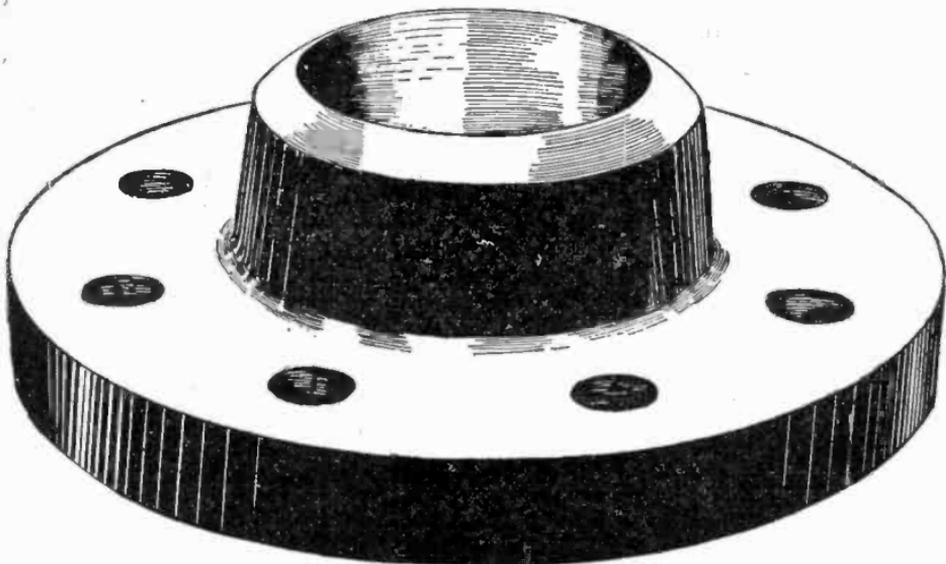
,191.—Pennforge flange as manufactured for welded pipe joint.
